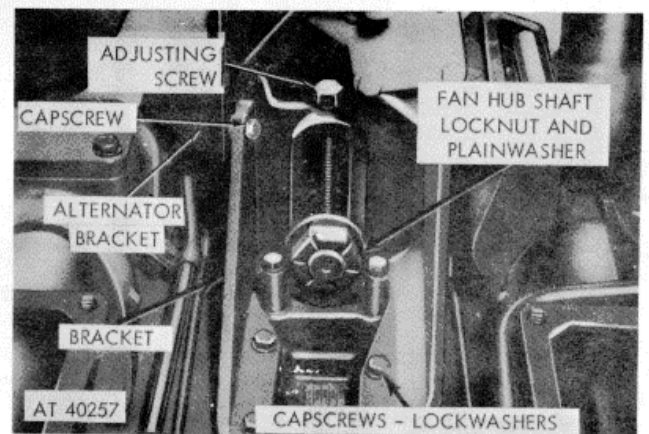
Fan hub and bracket assembly--removal/installation.
